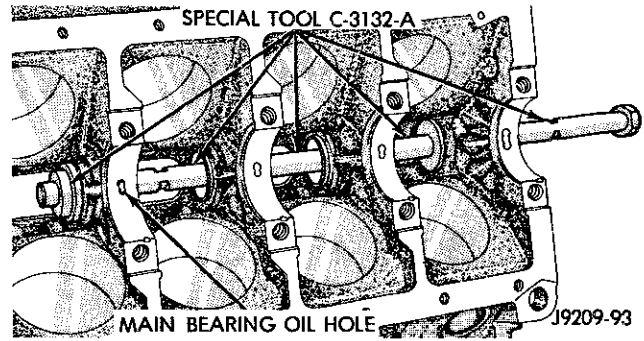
Camshaft Bearings Removal/Installation with Tool C-3132-A
